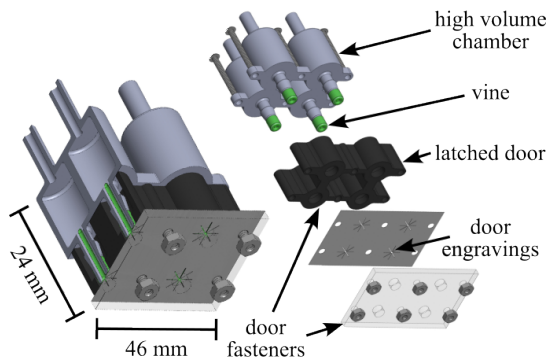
Cross sectional and exploded view of the CAD model of the prototype with 4 injectors.
